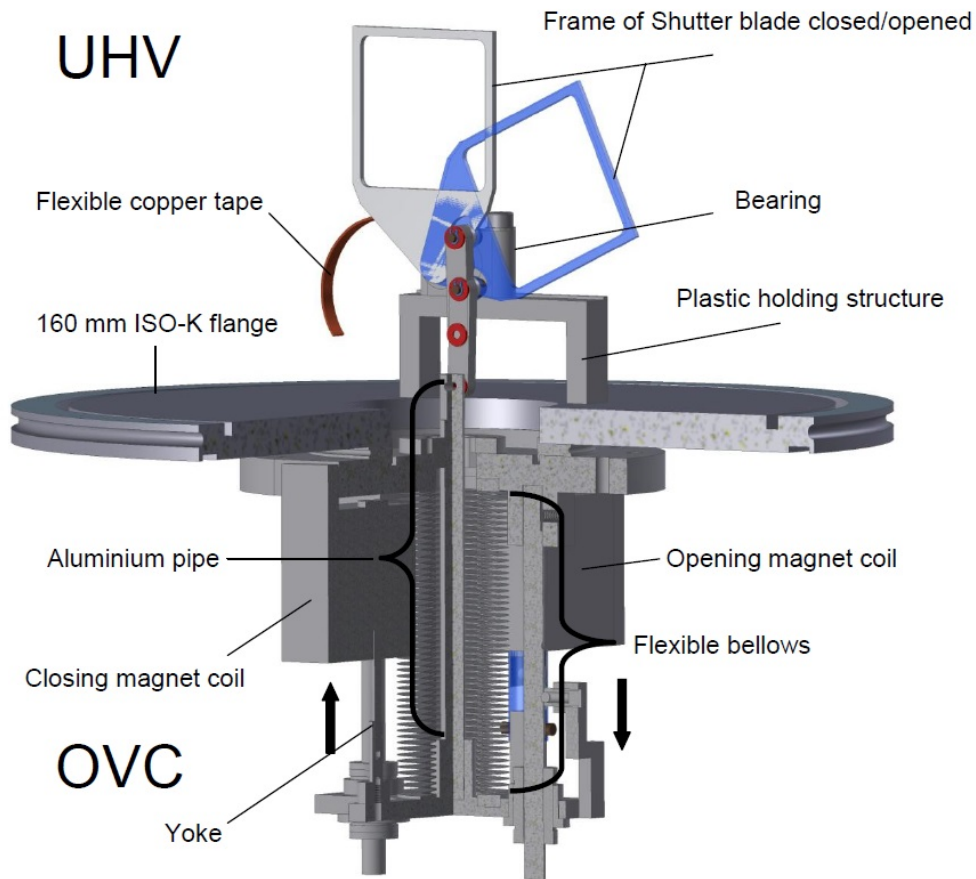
Technical drawing of the final design of the shutter prototype. See text for details. Drawn by D. Stückler (SMI).
